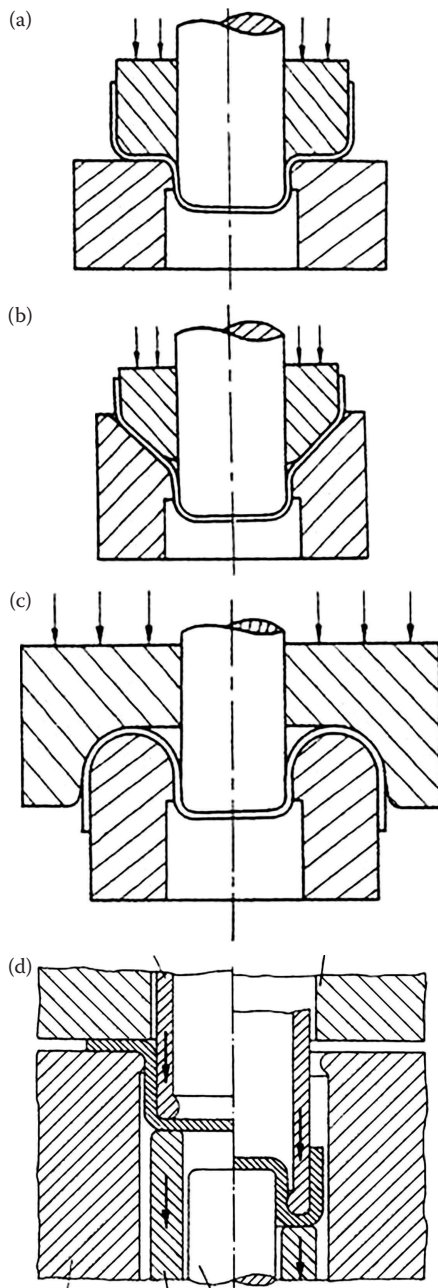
(a) Direct redrawing, right-angle tool; (b) direct redrawing, conical tool; (c) reverse redrawing, separate tool; (d) reverse redrawing, combined tool
